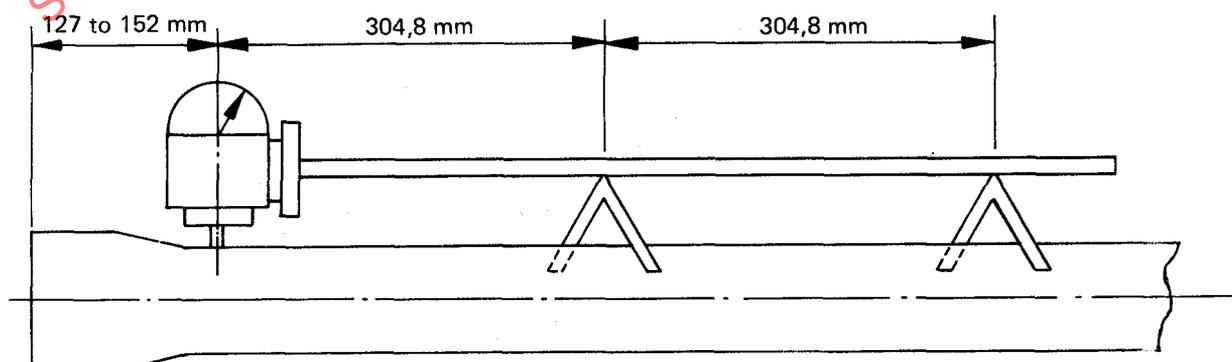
Saddle gauge for measurement of eccentricity of drill pipe upset end
